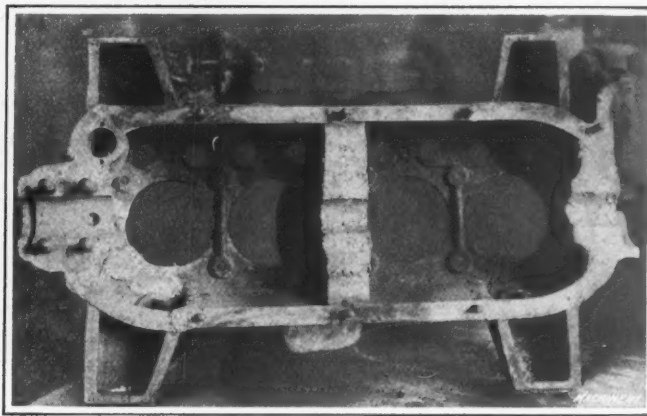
Upper Half of Crank-case as shown in Fig. 20, with welding completed
